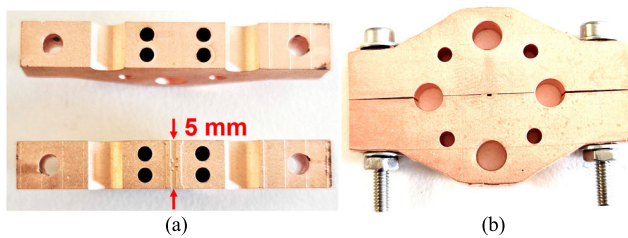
Photographs of a 3-D printed H-plane split-block WR-2.2 3rd order Chebyshev filter (after copper plating): (a) disassembled; and (b) assembled.
